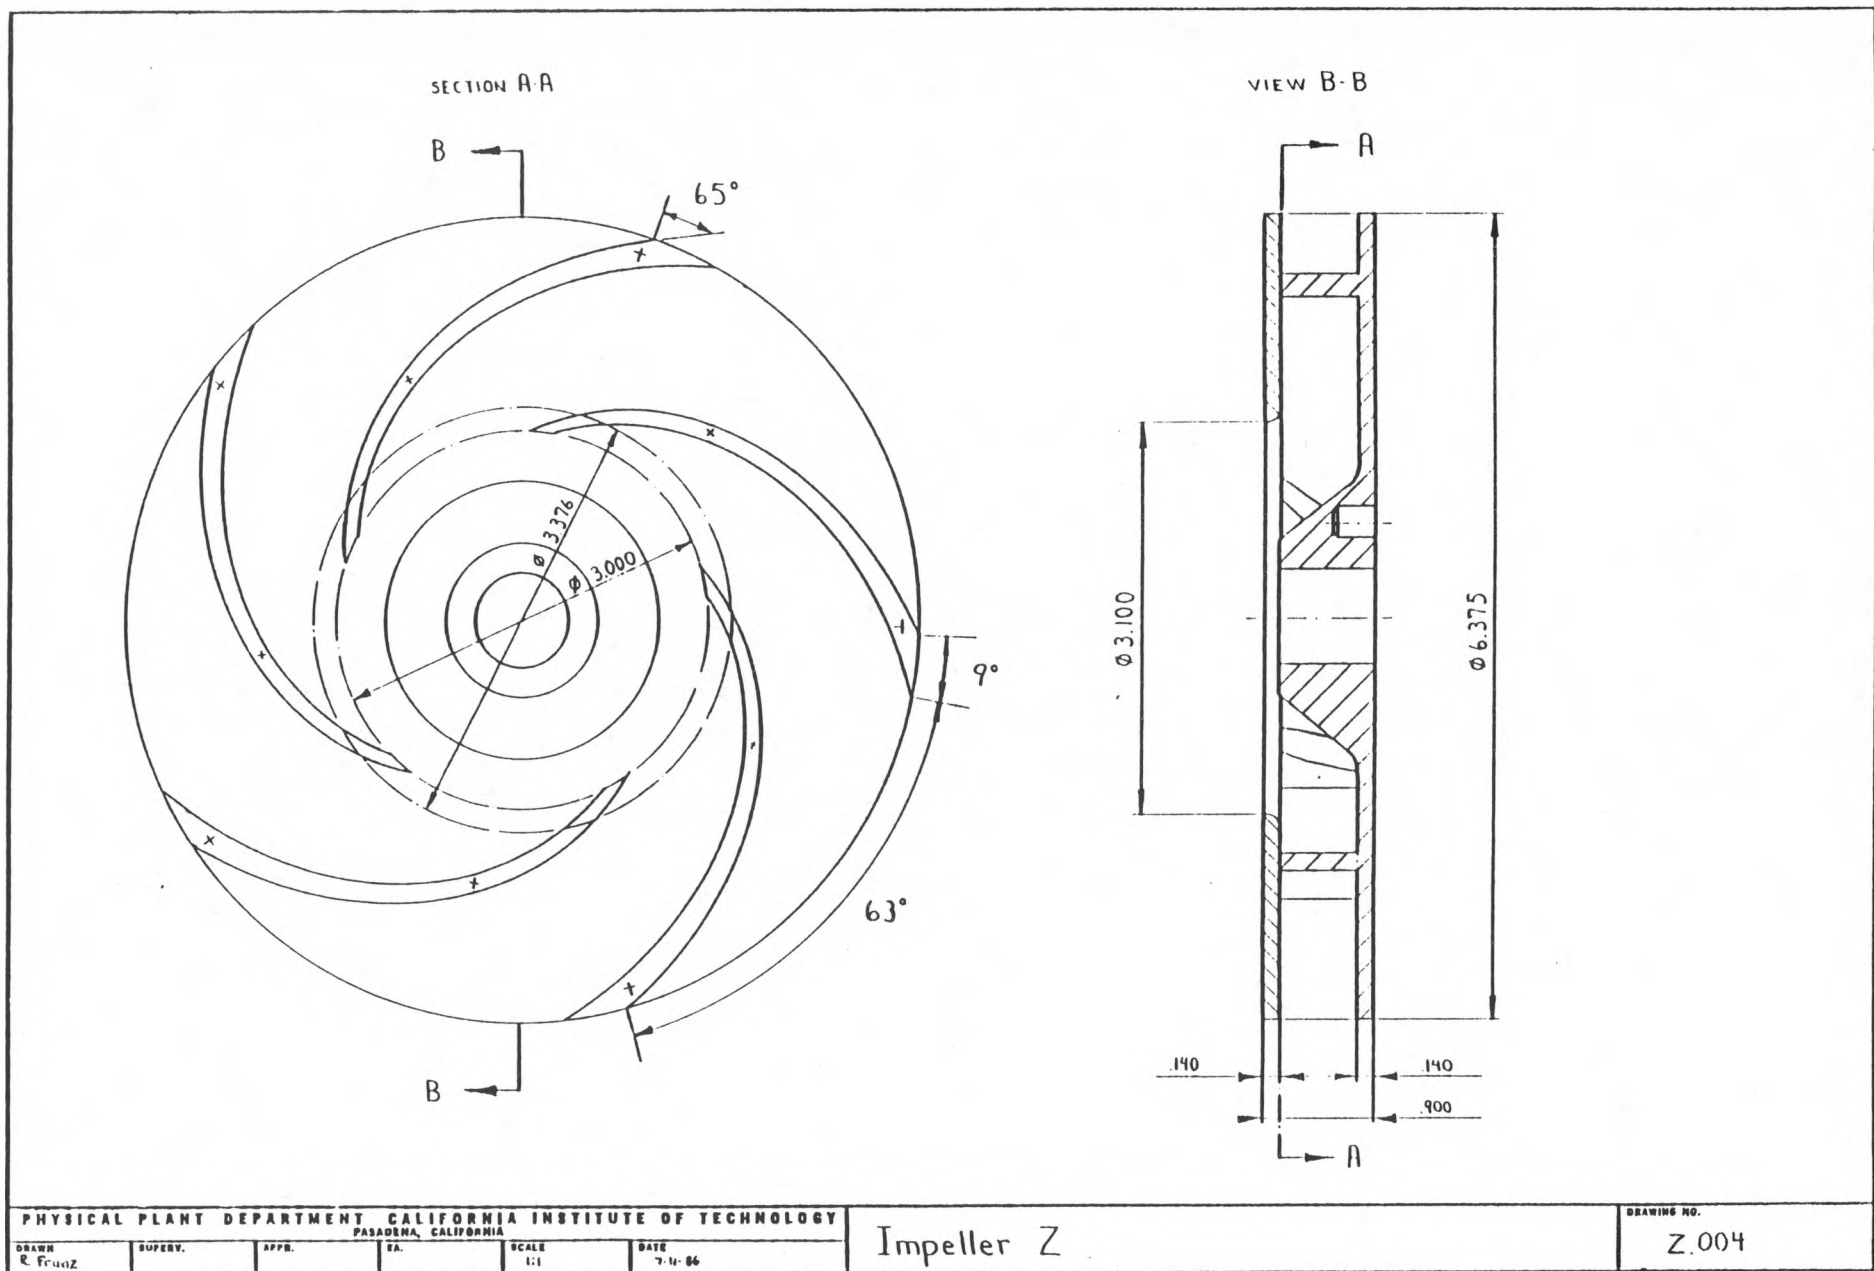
Drawing of impeller Z, a two-dimensional model of impeller X.
